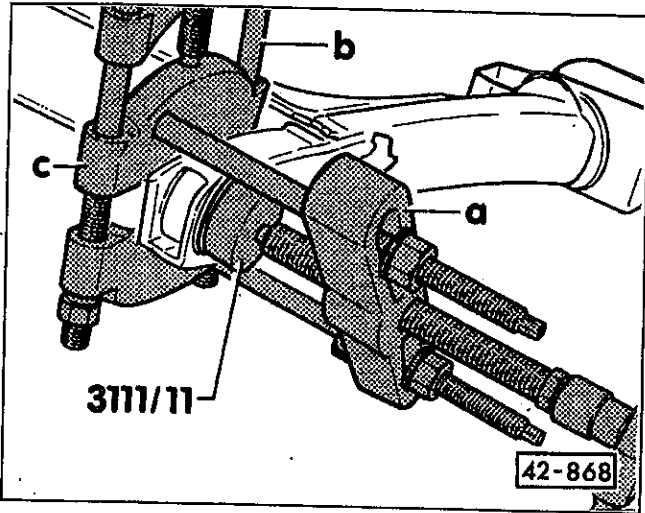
Rear axle bushing being pressed out. Numbers indicate Volkswagen special tools.
